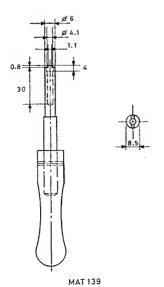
Dimensional drawing of tool for slotted nut.
